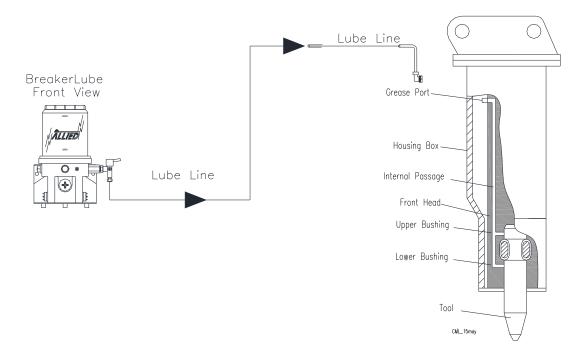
Configured with Single Pump & Lube Line. Breaker Shown with Single Lube Passage to Both Bushings
